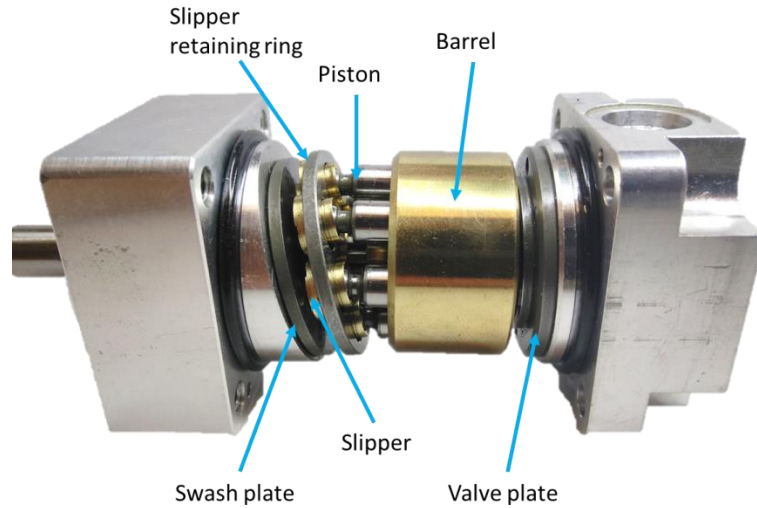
Takako 0.8 cc/rev axial piston pump
